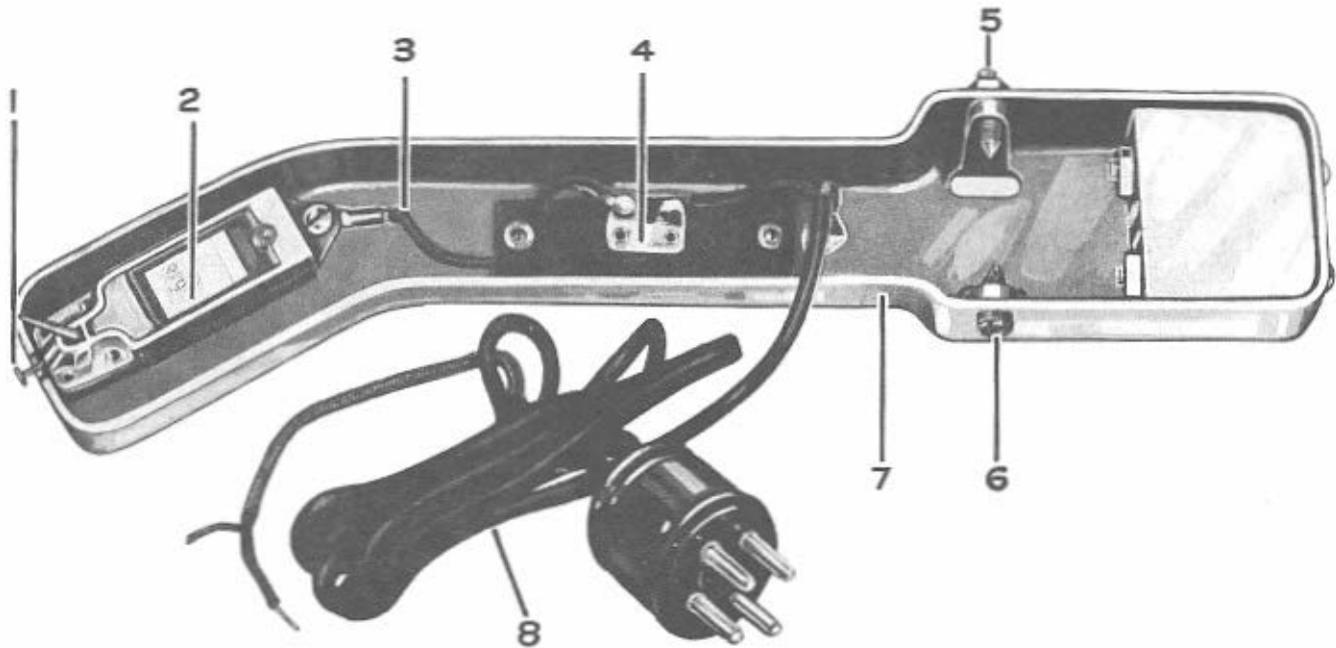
No. 11680-A Tone Arm and Wiring Assembly
